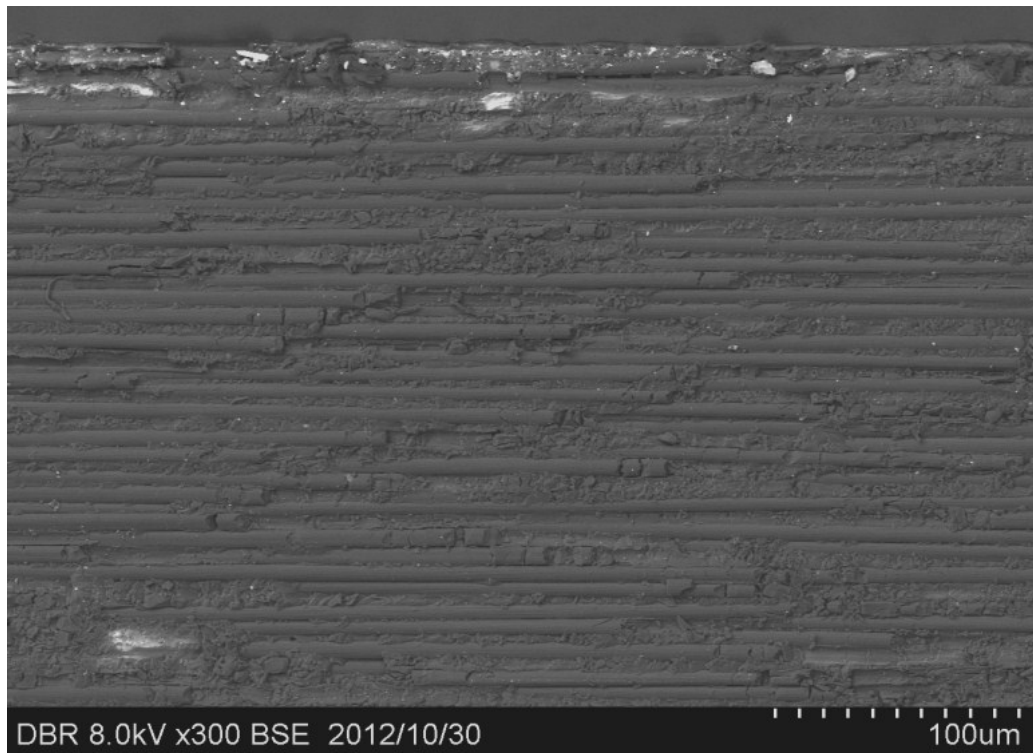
SEM image of finish surface of Material A 0° (Machined with Tool No.1: Helix angle 0°) (Up cut method)
